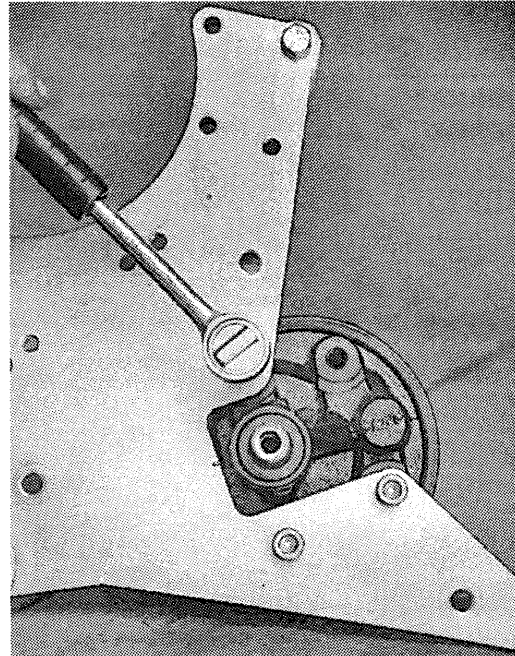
/ Mounting the P/S pump to the S/C bracket
